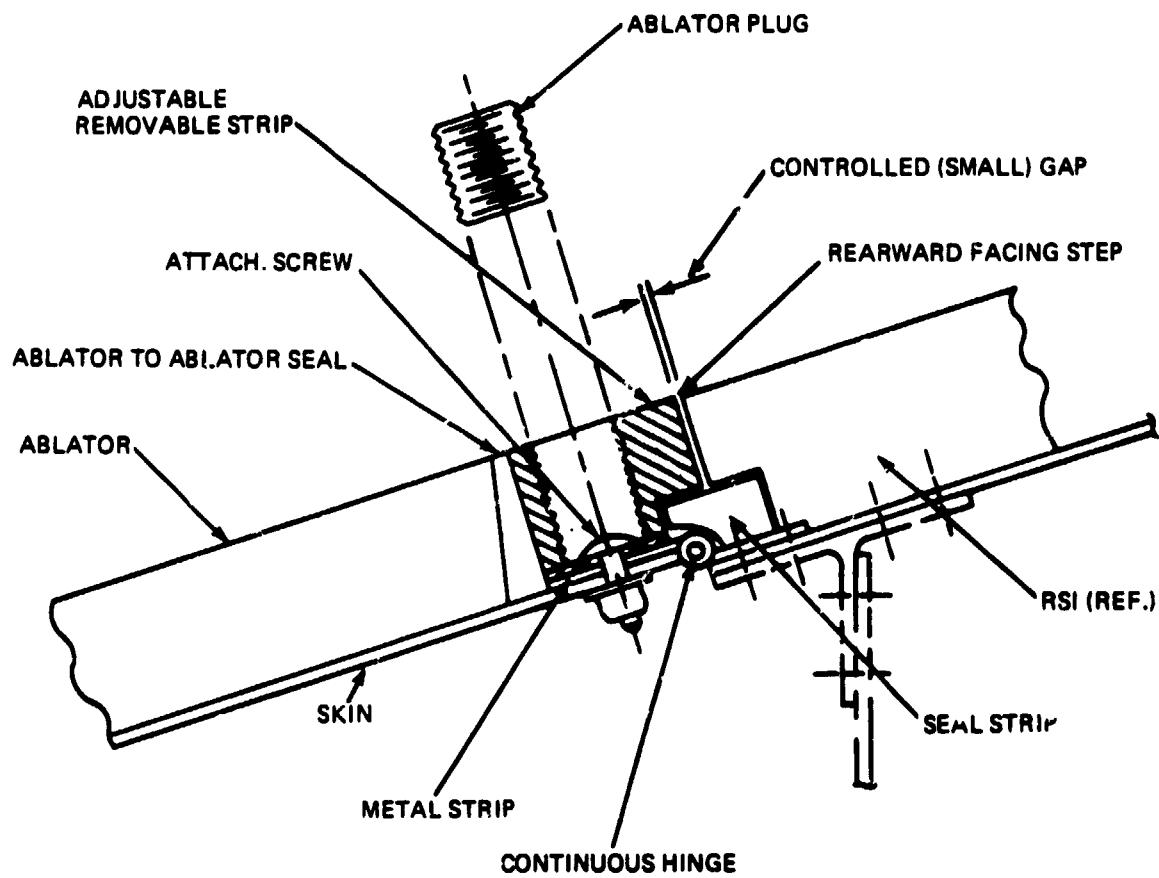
Ablator/RSI Joint: Controlled Gap With An Externally Bolted Ablator Strip (Metal Strip)
